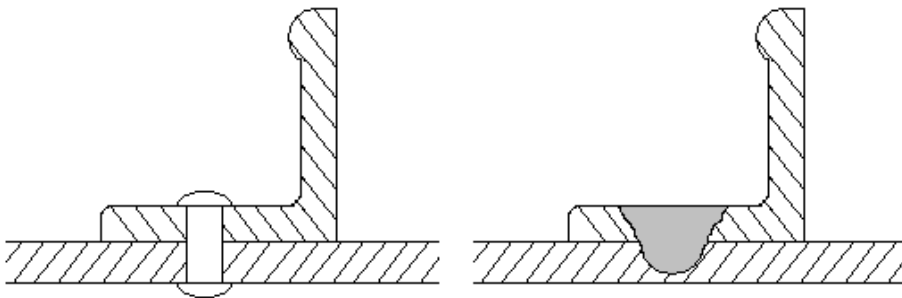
Traditional (a) and friction stir welded (b) plate-stringer joint configuration solution
